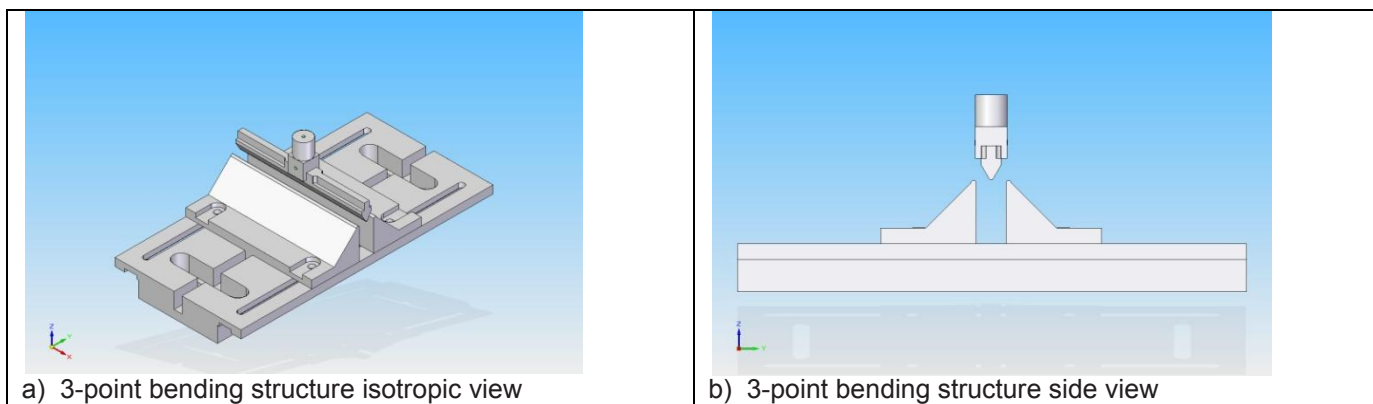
Assembled bending structure schematic, showing extra wide design to accommodate full 100 mm diameter wafers.
